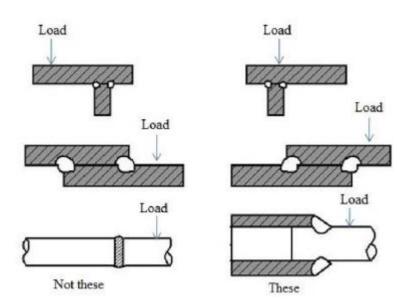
Design of weldments to minimize stress concentration in the weld fillet
